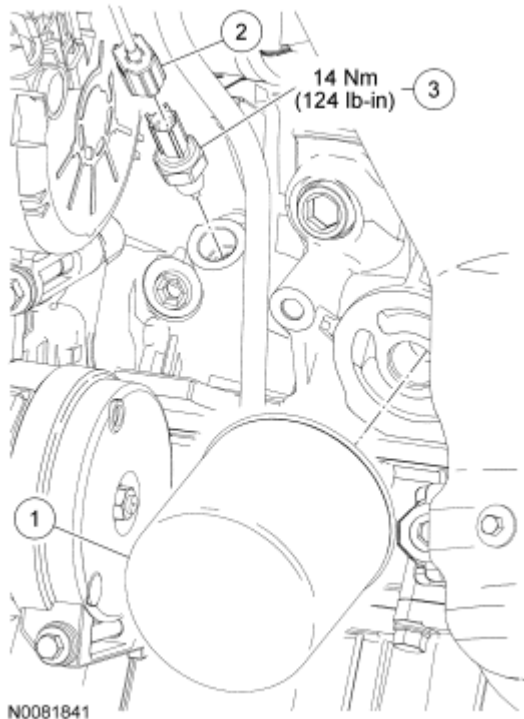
Exploded View Of Engine Oil Pressure (EOP) Switch With Torque Specification
